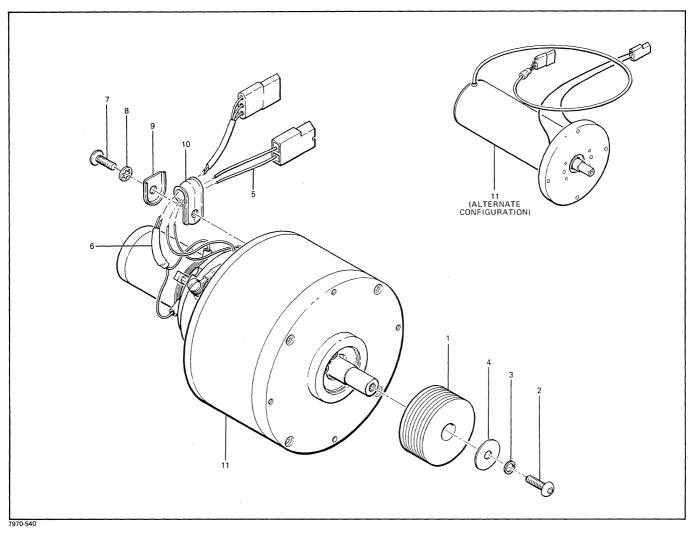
Capstan Motor Assembly MG1, 37.6 - 45 ips
